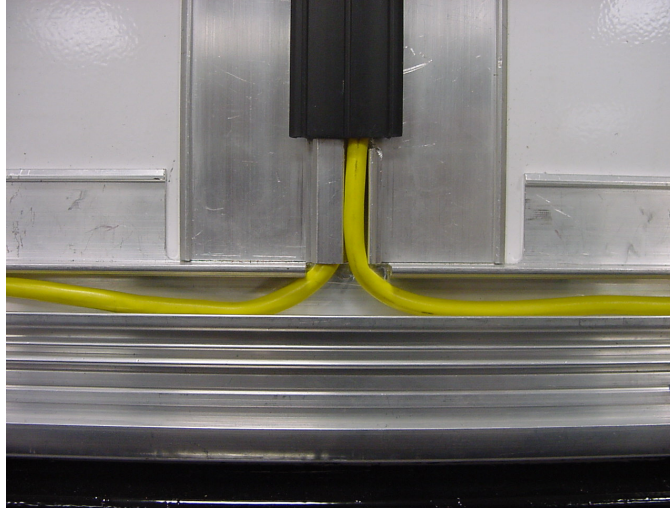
Picture of Joining Trim Cutout where Joining Trim enters Ramp Trim
